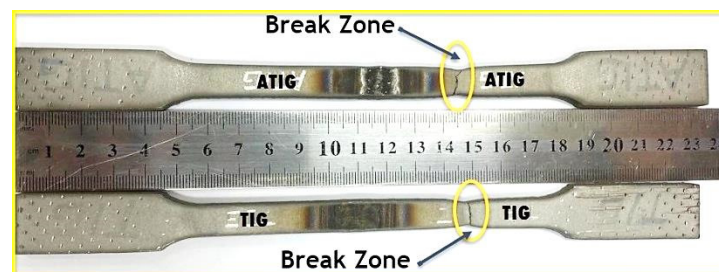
Failure zone in tensile test for ATIG and TIG welds.
